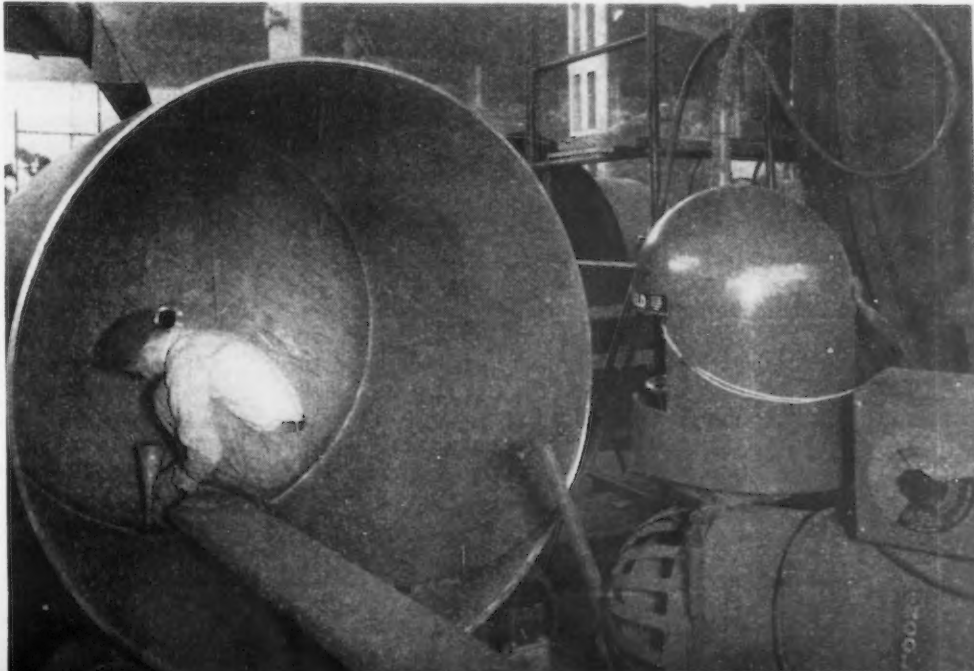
The outside of the seam is welded, joining the head to the shell. One pass on each side gives complete penetration. The head is first tacked to the shell with a low hydrogen, lime-ferritic electrode by open arc welding.
